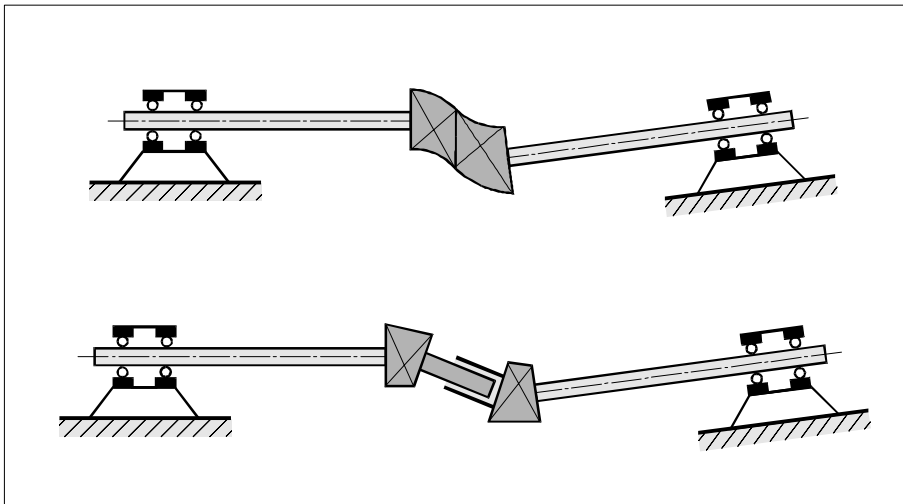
Superimposed offset with compensating element, double joint coupling above, joint shaft below
